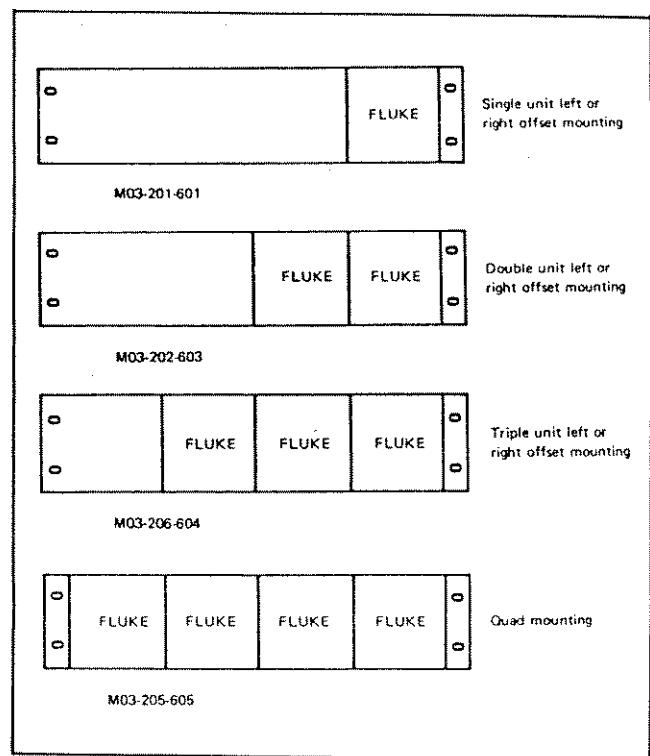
RACK MOUNTING CONFIGURATIONS.
